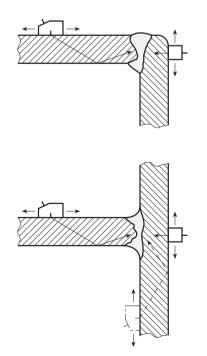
Testing for longitudinal defects in corner and T-joints
